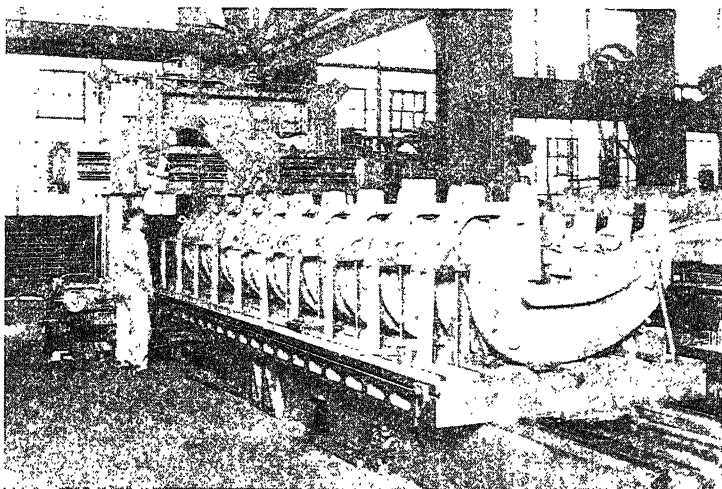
An angular cut on a "string" of punch-press bodies. (Courtesy of Cincinnati Planer Company.)
